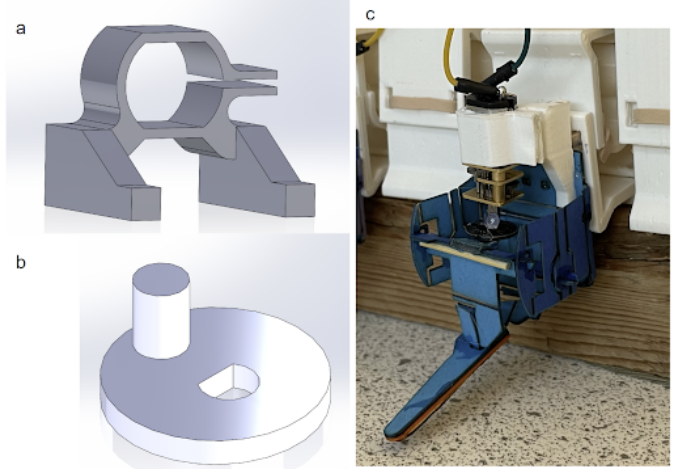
(a) CAD model of motor mount; (b) CAD model of motor-to-leg linkage disc; (c) 3D-printed mount and linkage disc with motor installed on leg module
